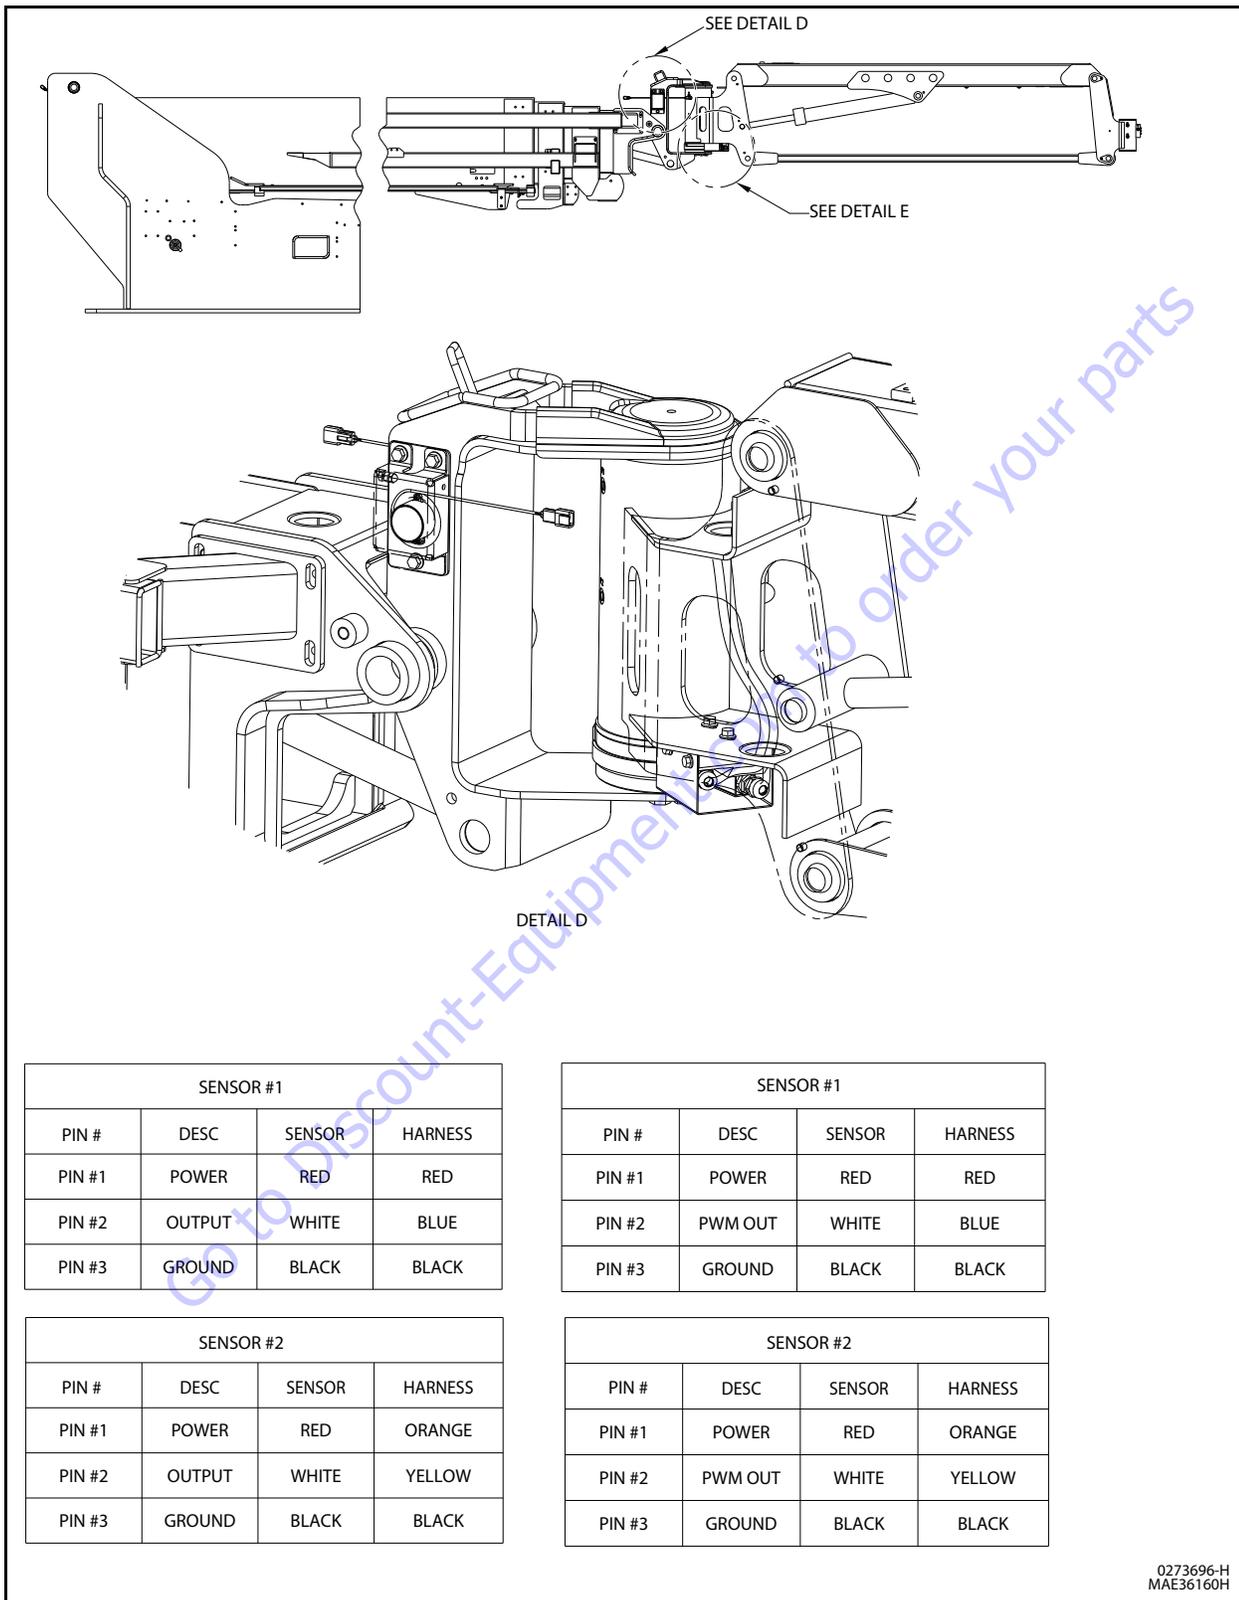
Boom/Jib Sensors and Switches Installation - Sheet 2 of 4
